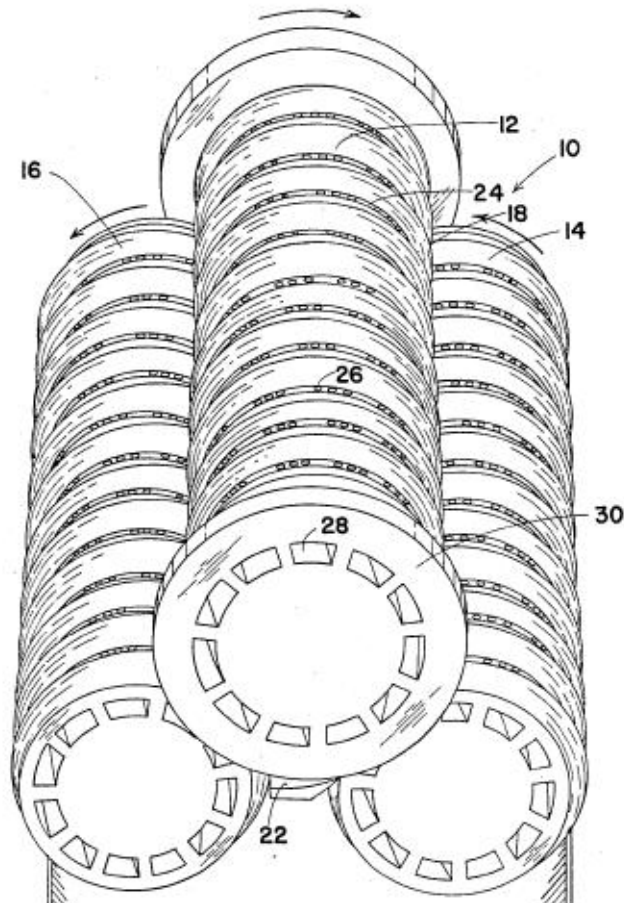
Drawing of mill rollers with V grooving and subsurface juice channels (Bouvet, 1985)
